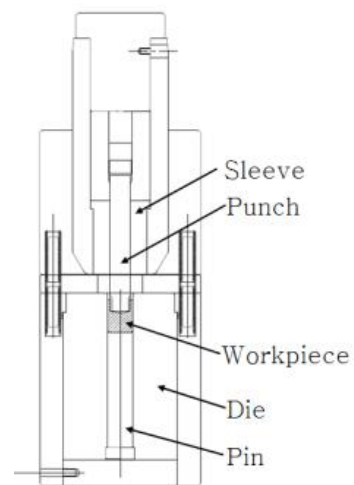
Schematic drawing of backward extrusion dies for internal spline
